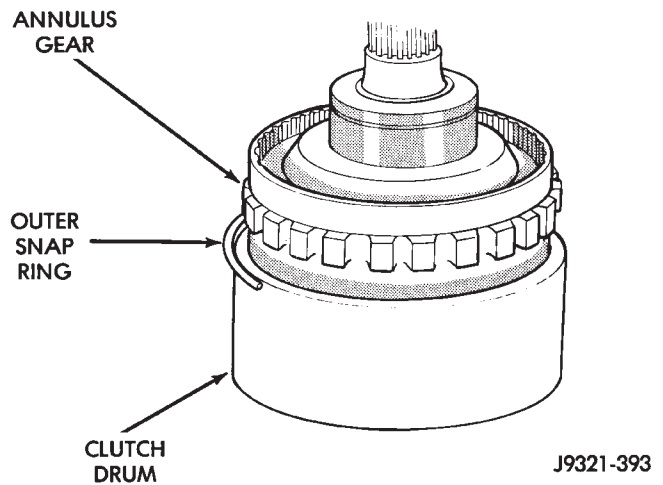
Clutch Drum And Outer Retaining Ring Installation
